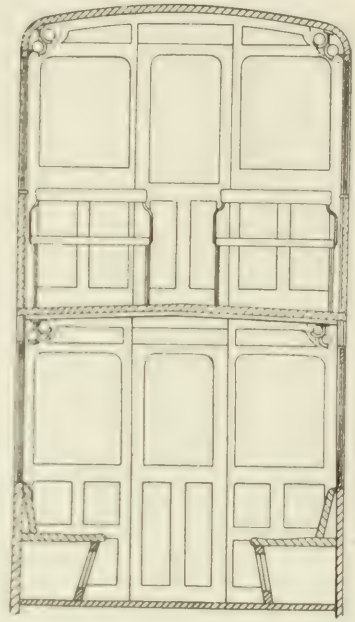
SECTIONAL ELEVATION OF A DOUBLE-DECK TRAM CAR, WITH THE VENTILATING CONES APPLIED
